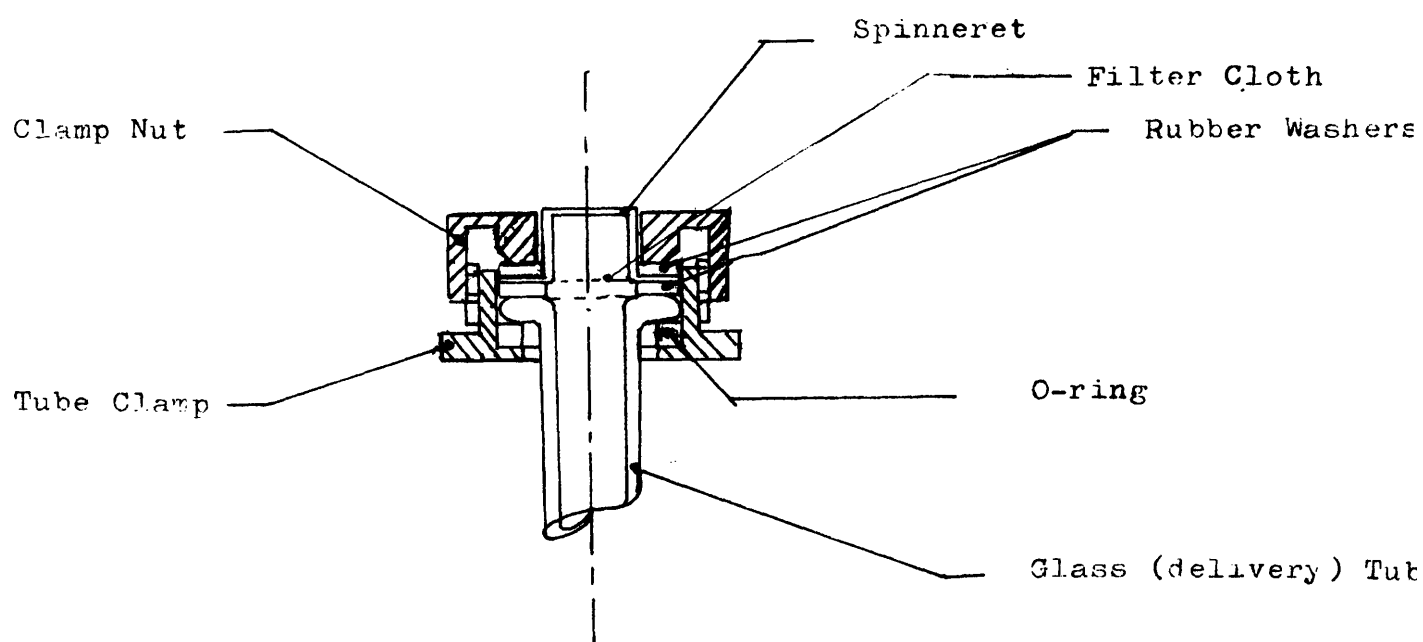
THE ORIGINAL ASSEMBLY OF SPINNERET MOUNTING.
